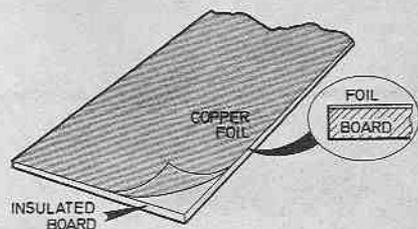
Printed circuit board consists of a copper foil bonded to an insulating material.
